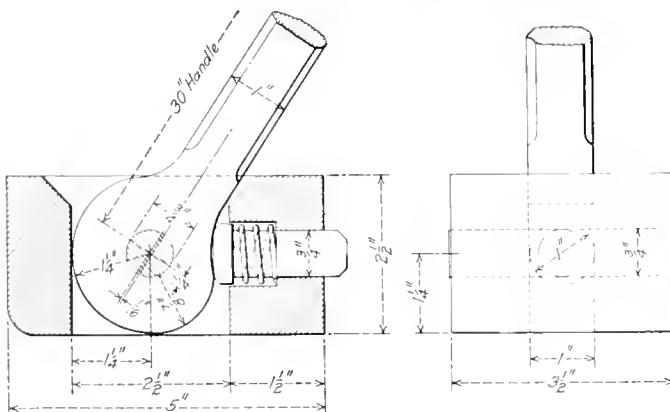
Holder-On for Rivets in the Flanges of a Driving Box.
